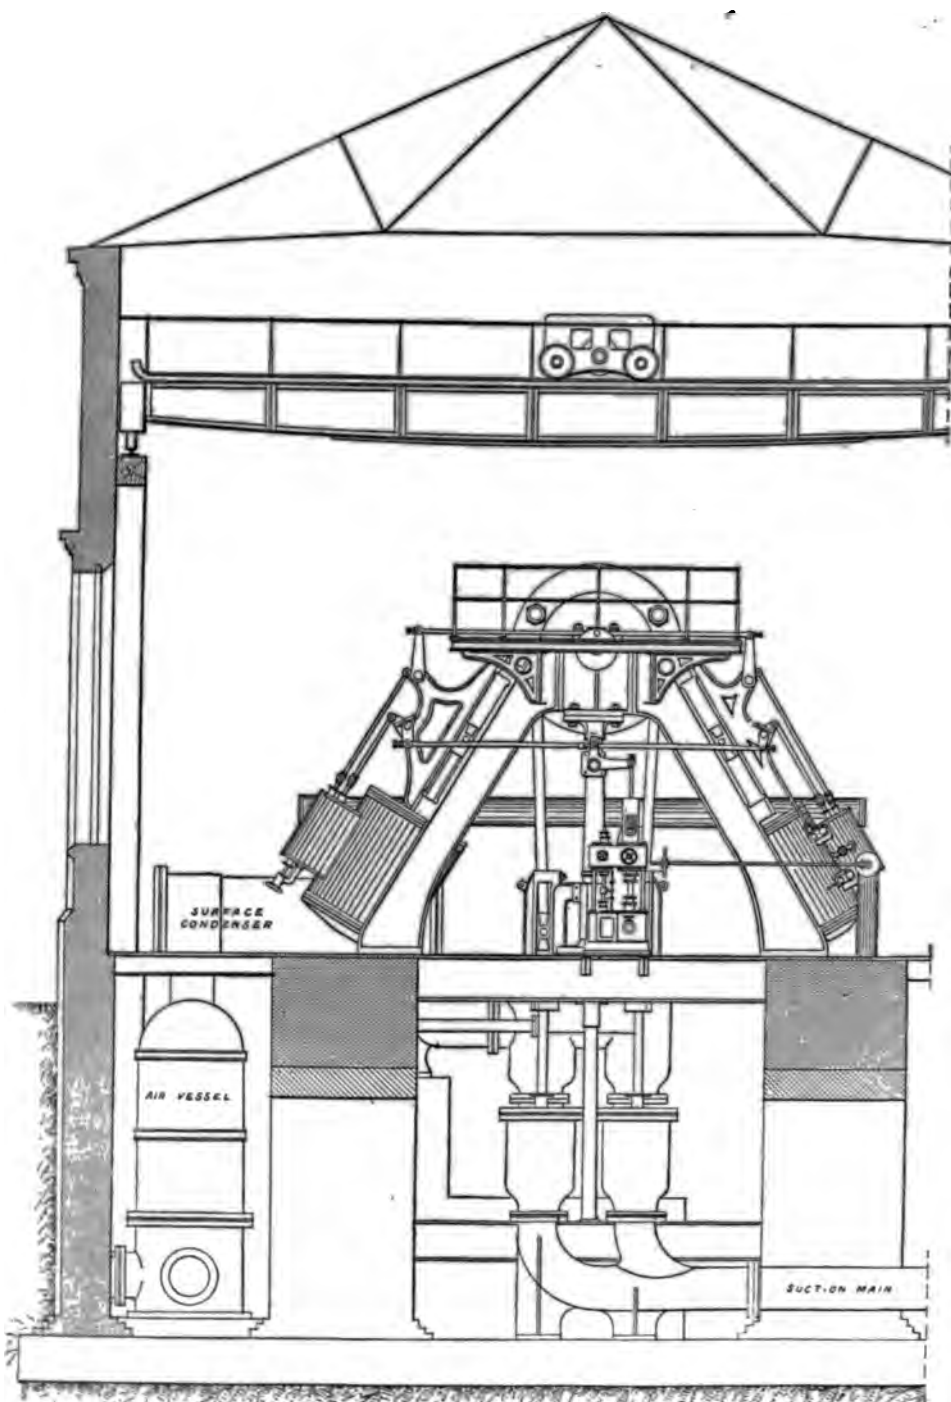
Davy Compensating Compound Pumping Steam Engine, with force or well pumps.
